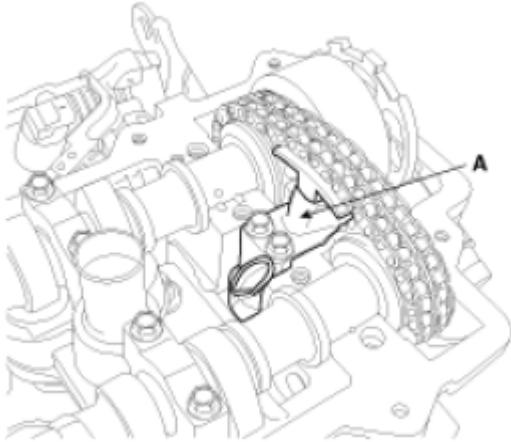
Identifying Chain Tensioner In Cylinder Head Assembly
